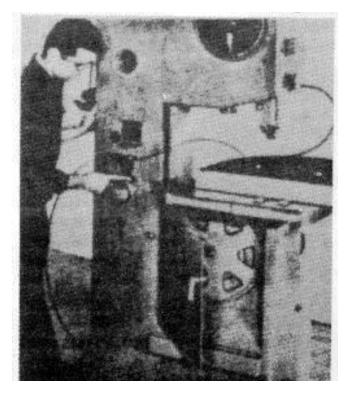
For internal contour sawing, run the band through a starting hole and weld.
